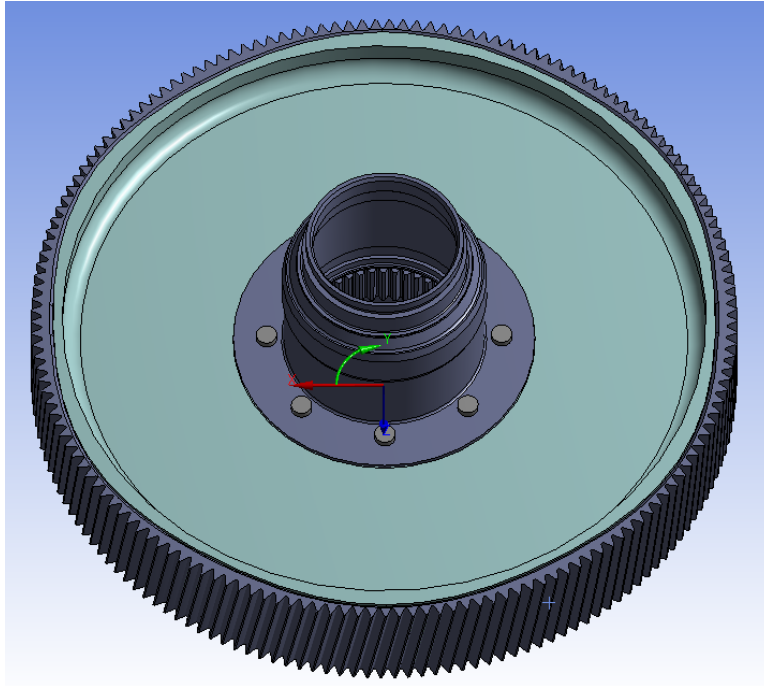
Isometric view of hybrid gear with mechanical interlock concept.
